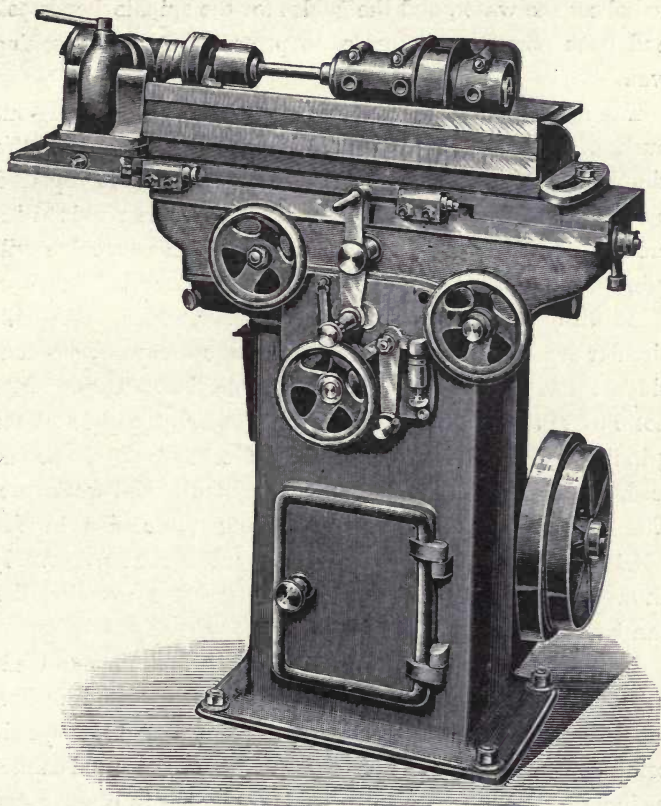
Naxos Union Automatic Circular Grinding Machine.
